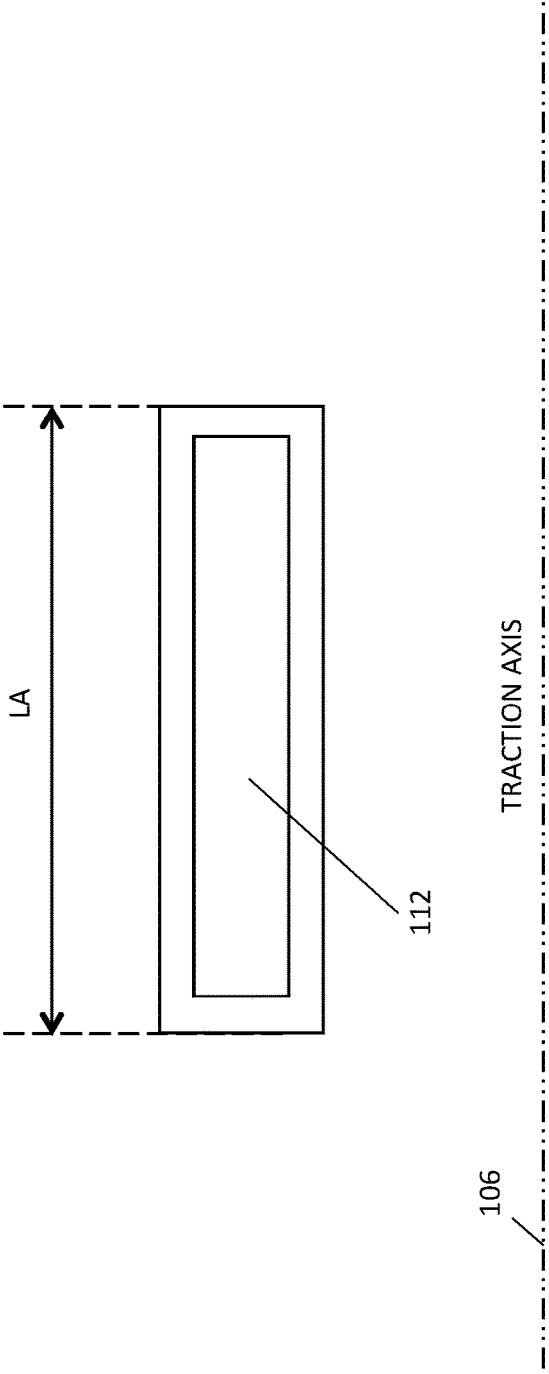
C - DETAIL, SIDE VIEW, EXTENDED
